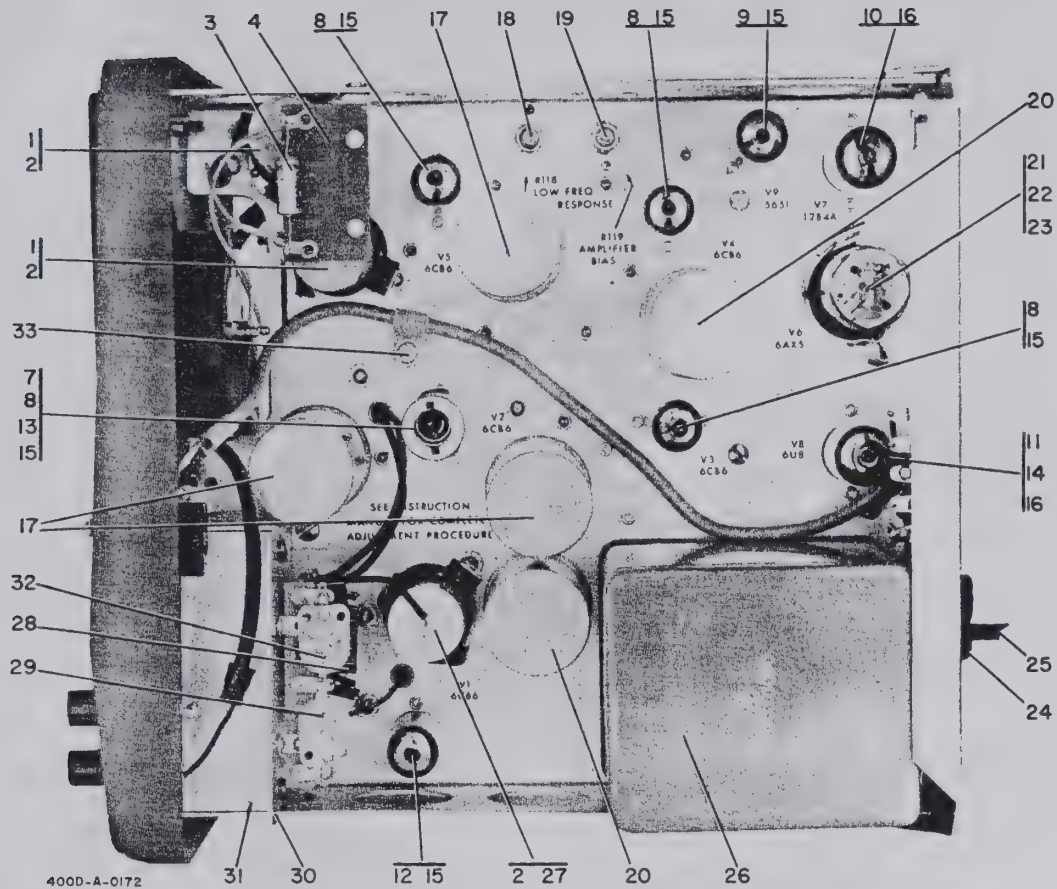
Main Chassis Assembly (Sheet 1 of 2)
